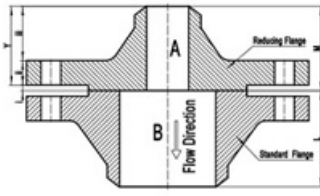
a reducing flange joint: reducing WN flange A and standard WN flange B.
